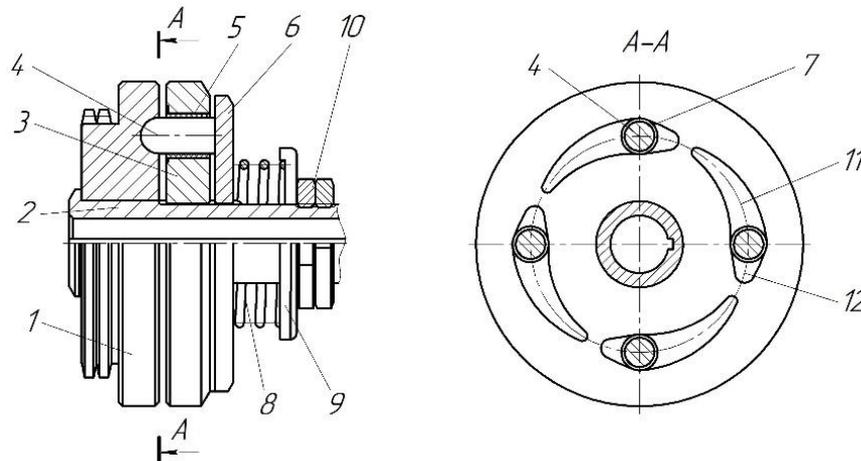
Design diagram of the safety clutch: 1 – driving semi-clutch; 2 – hub; 3 – driven semi-clutch; 4 – cylindrical pins; 5 – antifriction bushings; 6 – pressure disk; 7 – holes; 8 – spring; 9 – washer; 10 – nut; 11 – circular working grooves; 12 – circular reverse grooves
